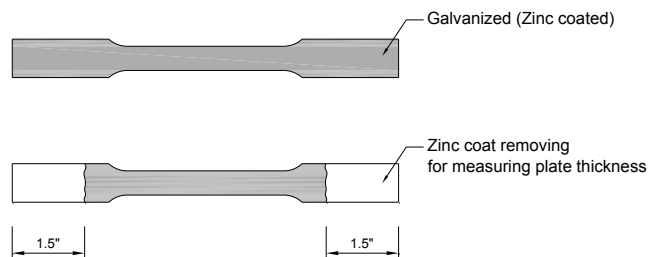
Coupon preparation: removing the zinc coating at the ends
